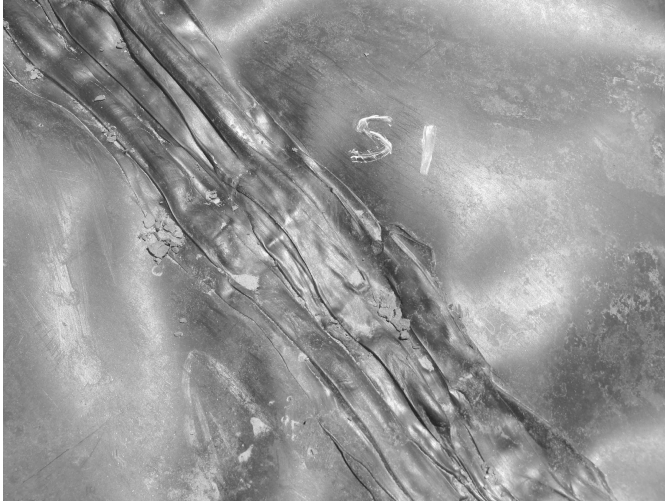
Photograph of total delamination of an extrusion fillet weld due to too low a hot air temperature (240 °C) whereas 250–260 °C is required for a good weld. Note that the extrudate weld is the lighter coloured material
